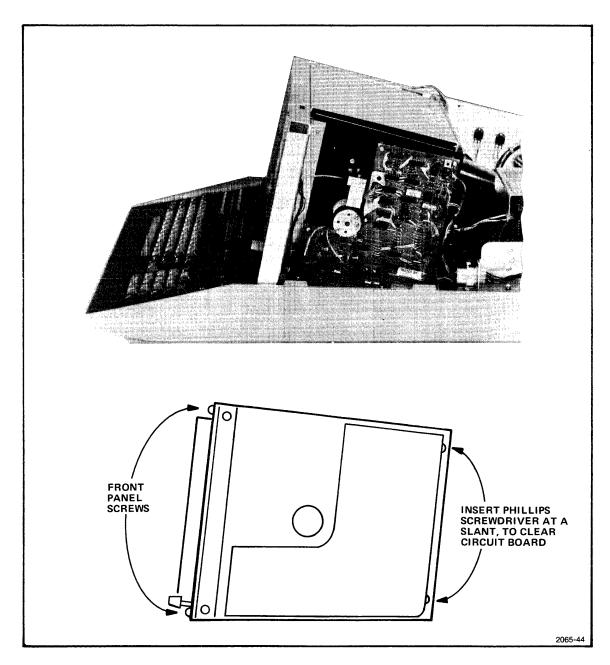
Tape unit assembly with pointers to the mounting screws.
